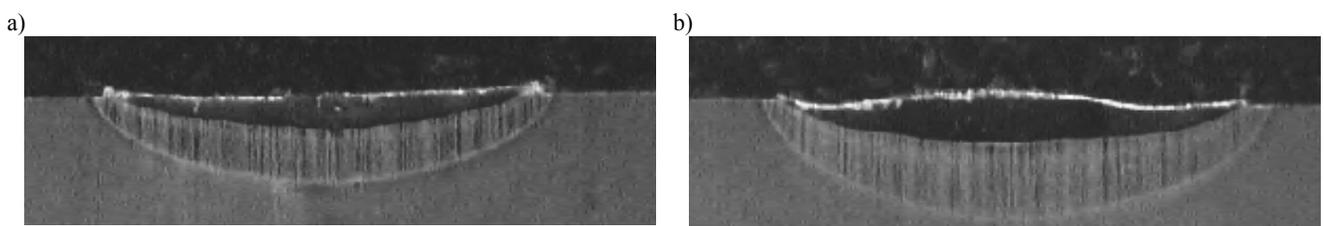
Remelted and heat affected zone in the surface layer of the 32CrMoV12-28 hot work tool steel alloyed with VC, scanning rate 0.5 m/min., a) power range 1.2 kW, b) power range 2.0 kW, mag. 50x
